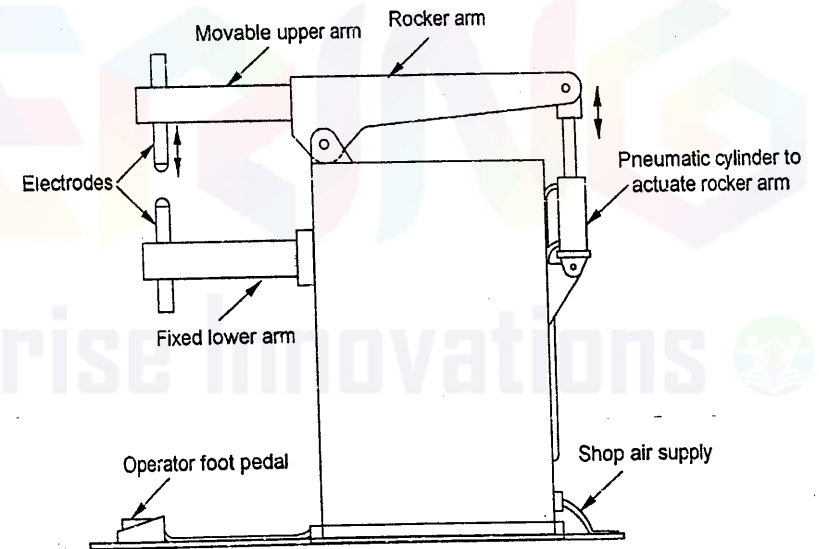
Air-operated rocker arm spot welding machine
